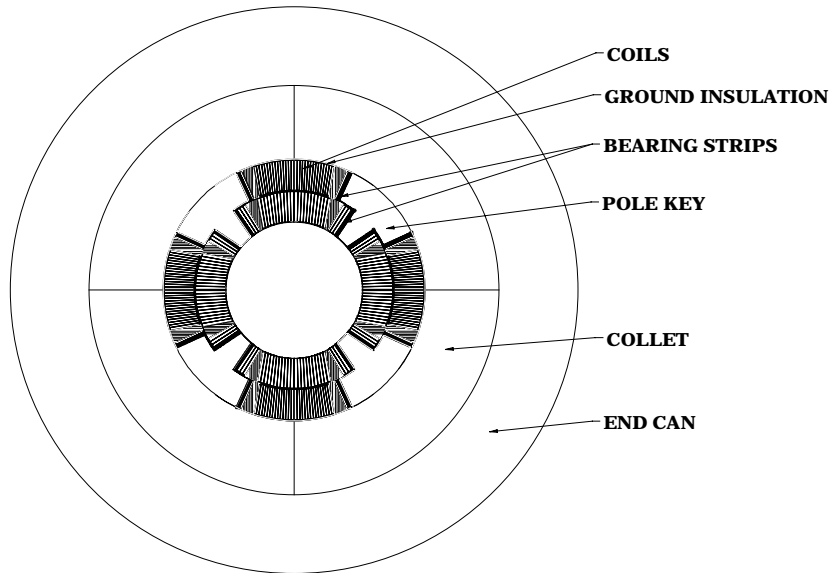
The collared coil cross section[HDG13]:
